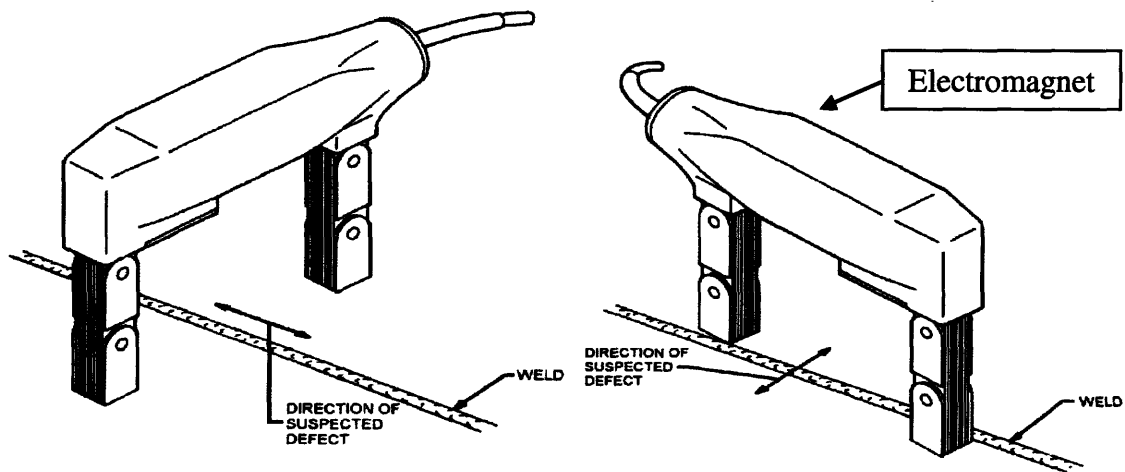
Magnetic Particle Weld Inspection [5].
